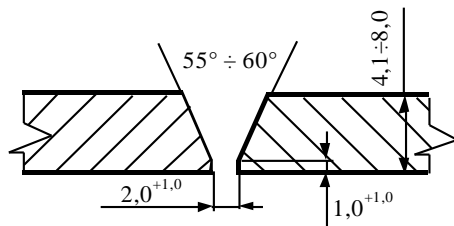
Dimensions and allowable deviations of welding sample
